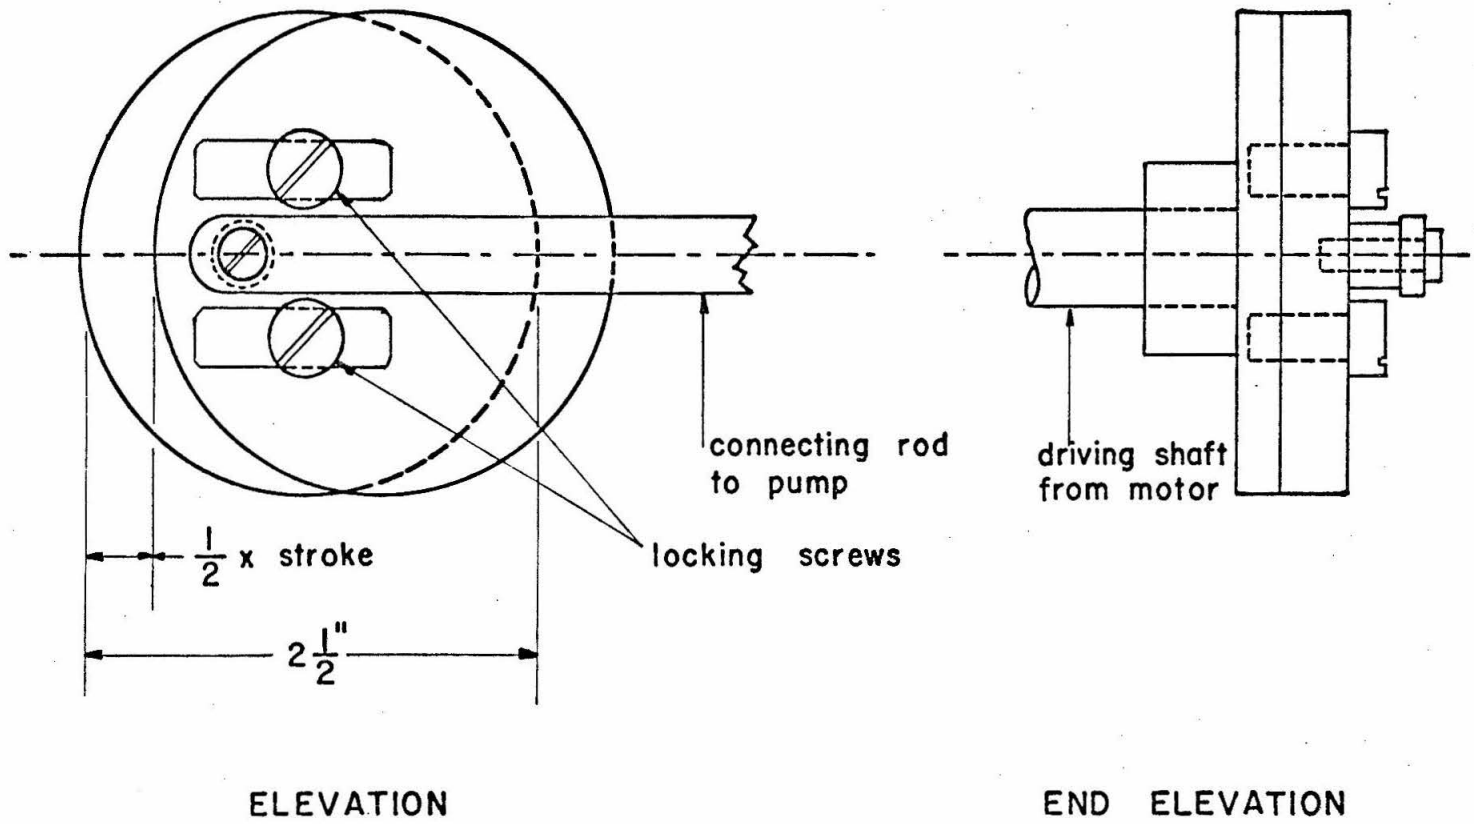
Adjustable cam mechanism. Scale: Full size.
